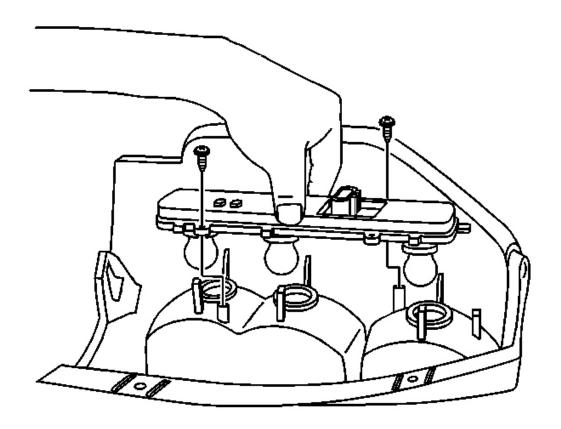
View Of Tail Lamp Circuit Board Courtesy of GENERAL MOTORS CORP.
